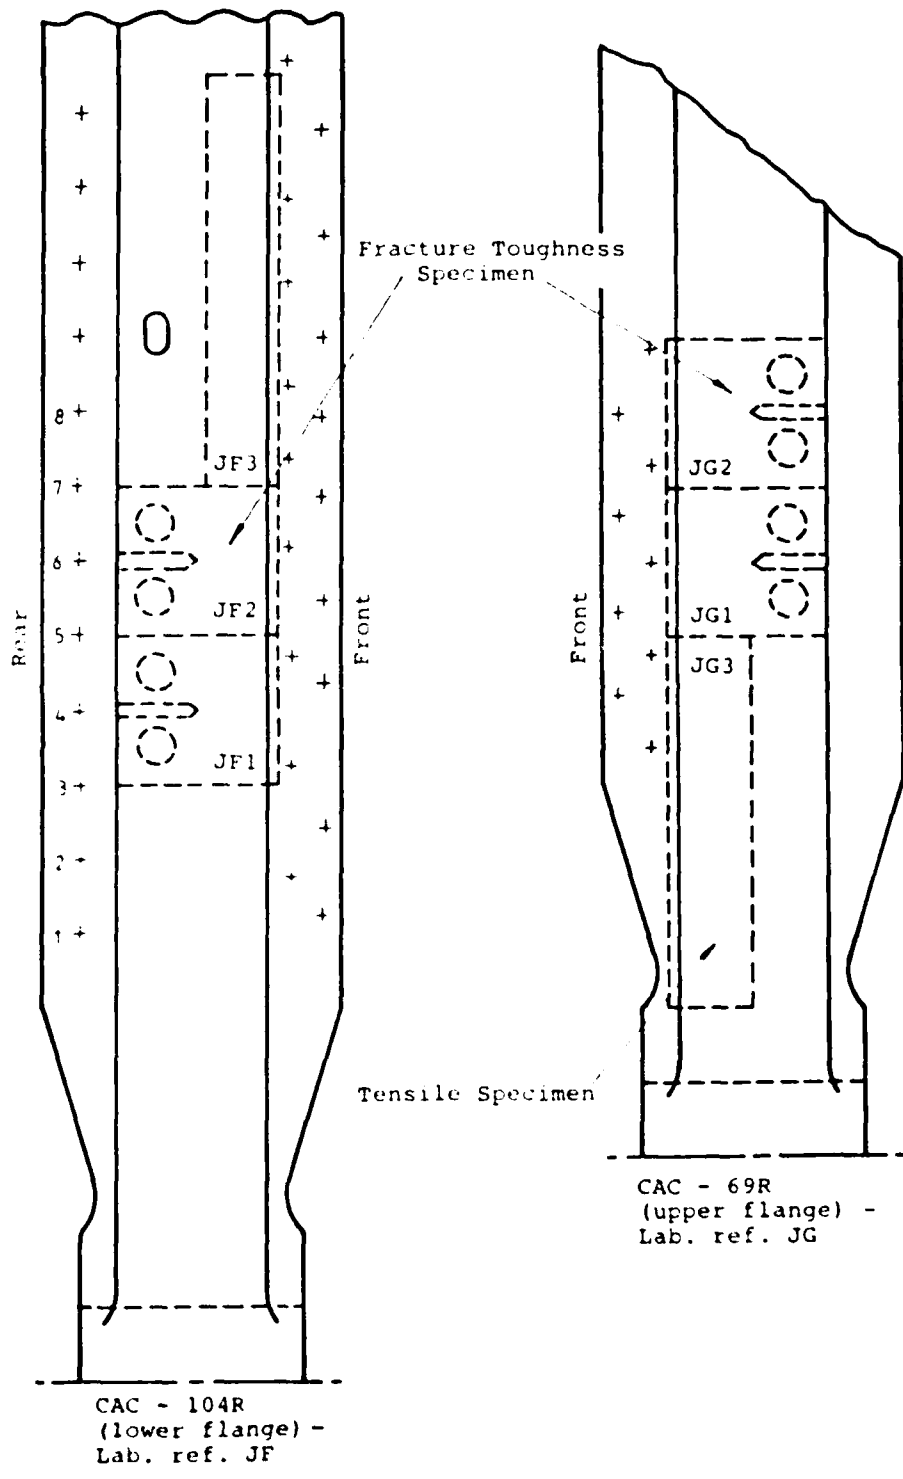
(b) LOCATIONS OF TEST SPECIMENS IN SPARS
